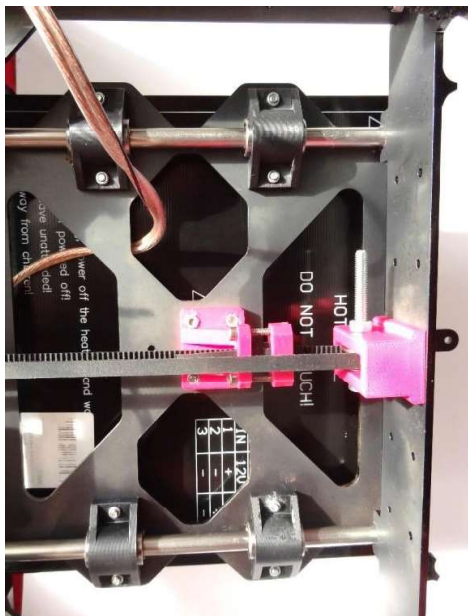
The assembled Y-axis, bearings mounting, tensioner mounting, toothed belt mounting, and the installed heating plate [own elaboration]
